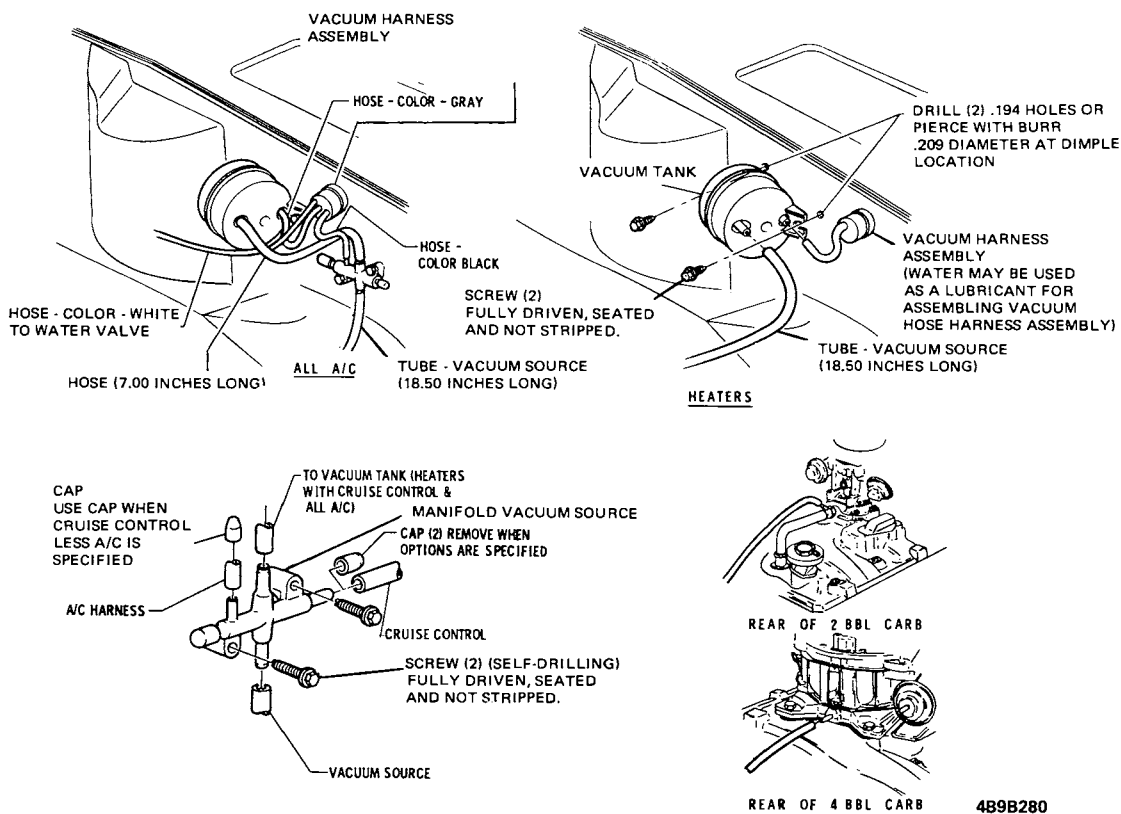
B-230 - A/C and Heater Vacuum Harness to Vacuum Tank and Manifold - B-C-E Series
